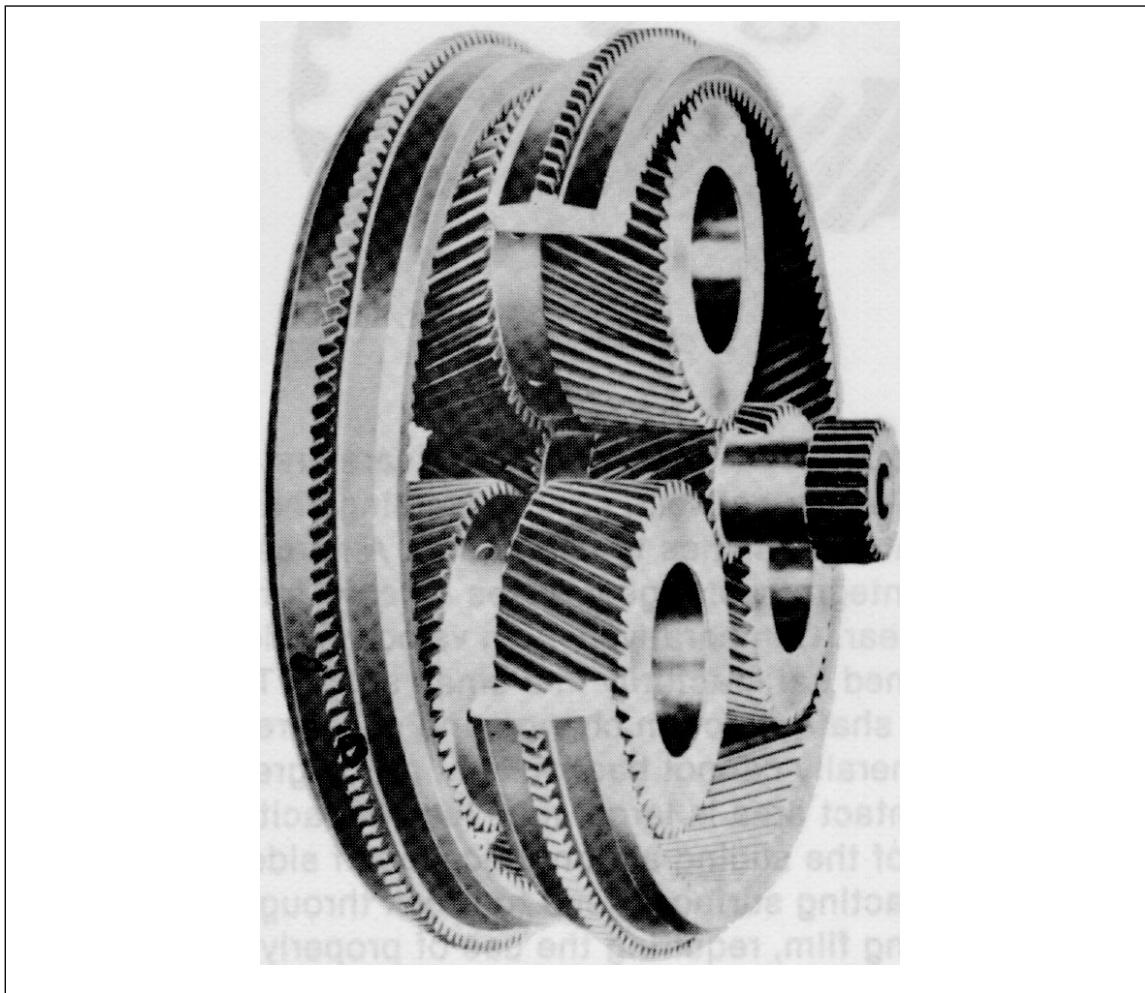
The outside or ring gear shown in this assembly is an internal gear. The small spur gears form a planetary gear set, with the one in the center known as the sun gear. (Cincinnati Gear Co.)
